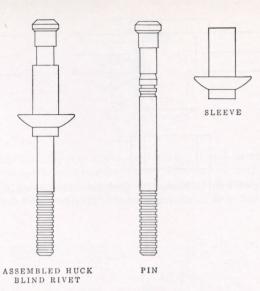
Assembled Huck Blind Rivet and its two component parts. Driving sequence is shown in Figures 4-53, 54, 56 and 57 below:
